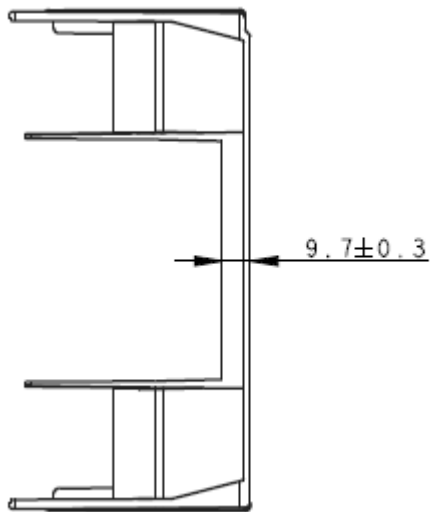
MiTAC E8020 Capri Dimension (Side View Detail 2)
